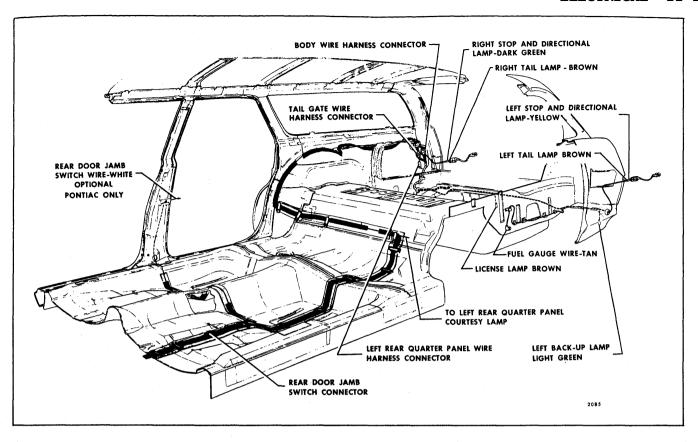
Right Side and Rear End Wiring - Chevrolet, Pontiac "B" Bodies
